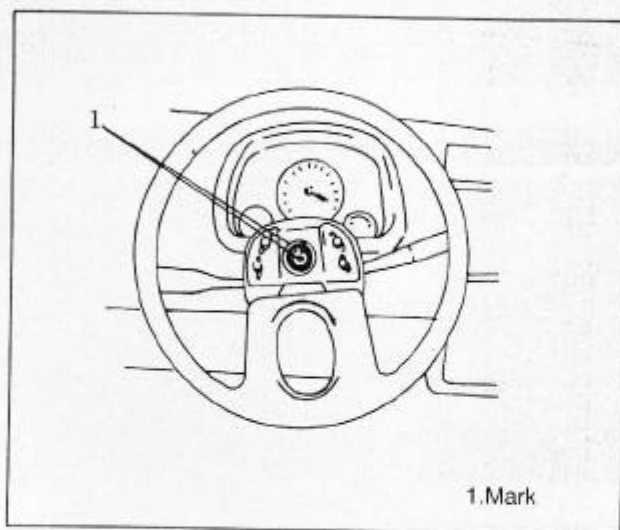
C — 6 MARK STEERING WHEEL AND SHAFT
